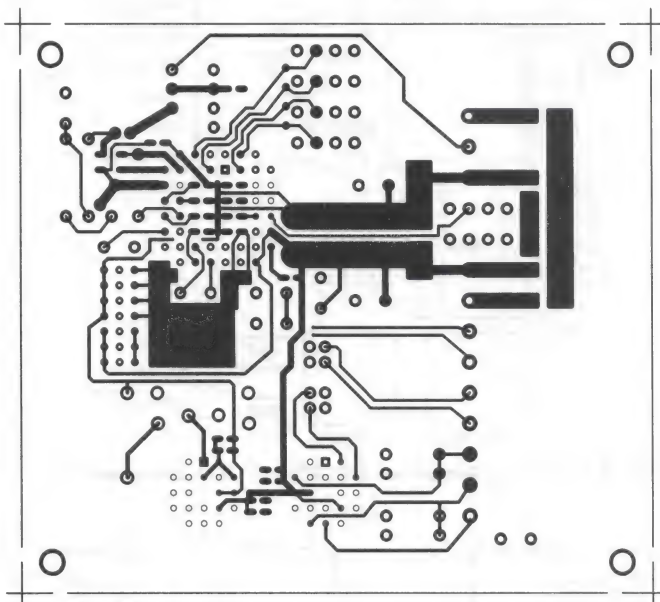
Solder Side, DP8512/13/14, Evaluation Board
